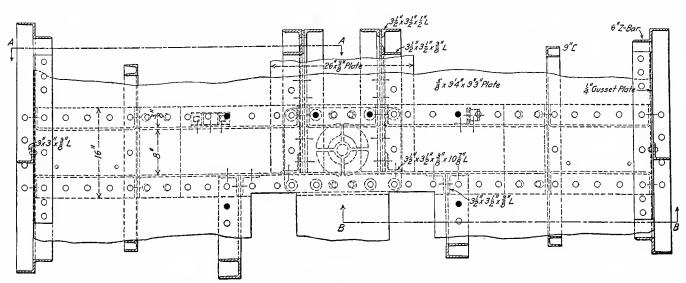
Body Bolster at Dynamometer End of Santa Fe Dynamometer Car Shown in Figs. 217 and 427-429.
